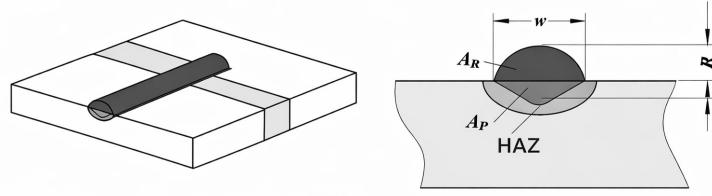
Cross-section of the weld bead (R —reinforcement; P —penetration; w —width)
